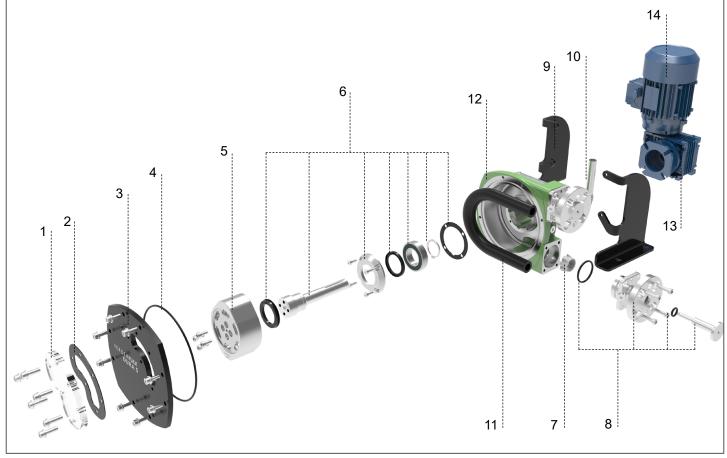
Dura MK IV 5, 7, 10 Exploded View (Generic View)
